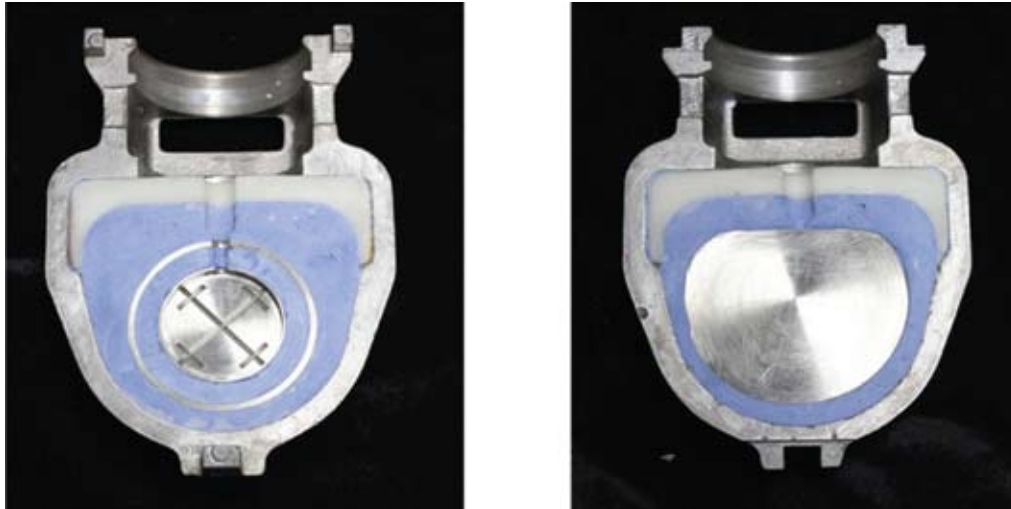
Circular stainless steel mold invested in flask for injection molding techniques
